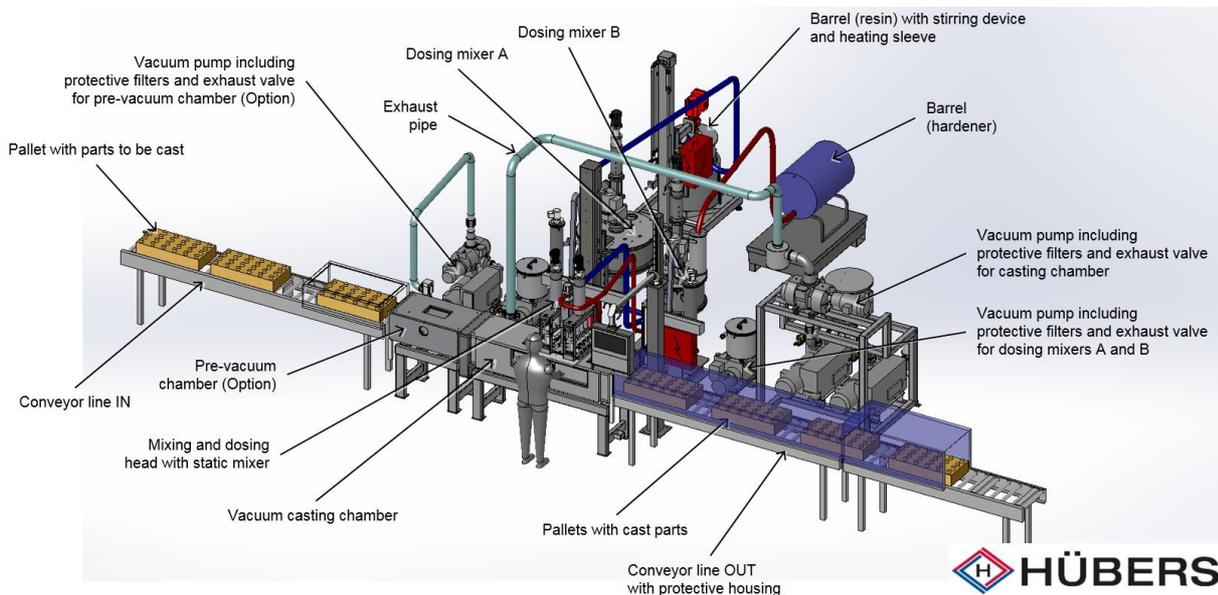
CAD Rendering of a Vacuum Casting Process. Source Hübers
